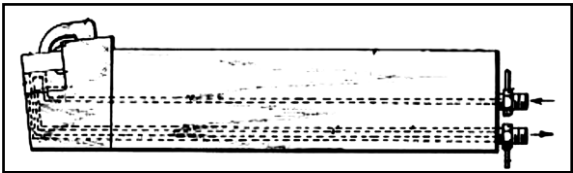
View of the Cooling Fluid Conduit Machined into the Cutting Tool Holder
